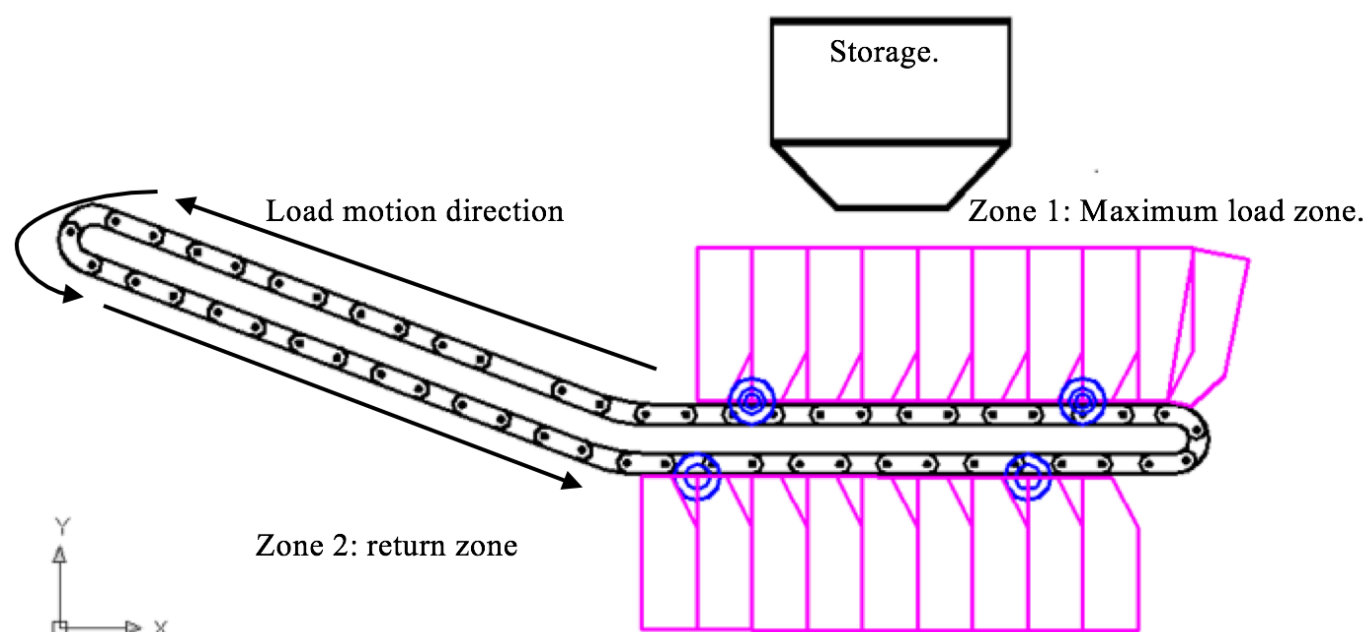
Bucket conveyor KZB-Q Pan conveyor – Aumund geometry.
